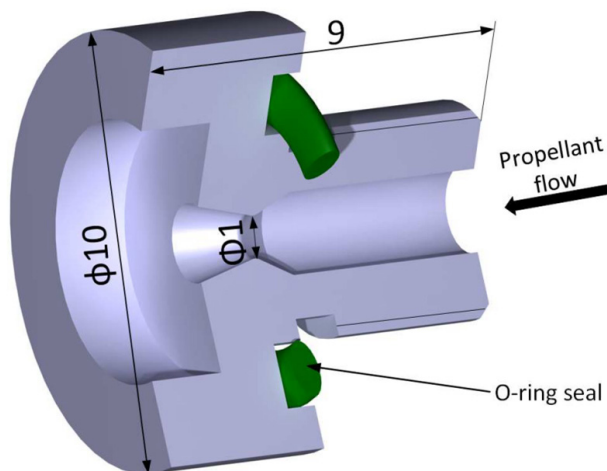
3D model of the nozzle used in the thruster (dimensions in mm)
